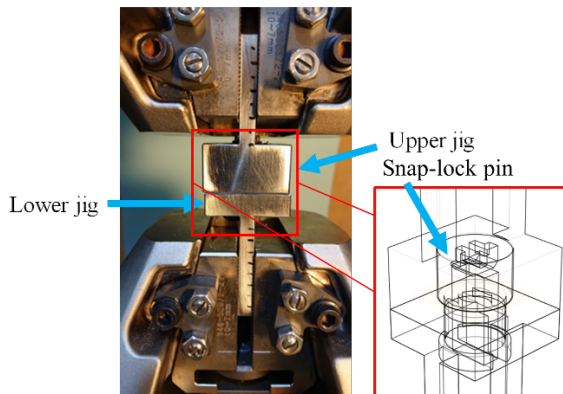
Tensile fracture test setup. The snap-lock is inside the upper and lower jigs.
